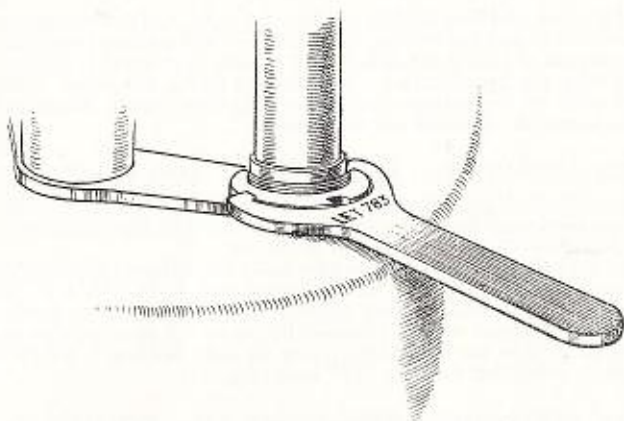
Service Tool No. LET 783 Fork Lock Ring Spanner.
